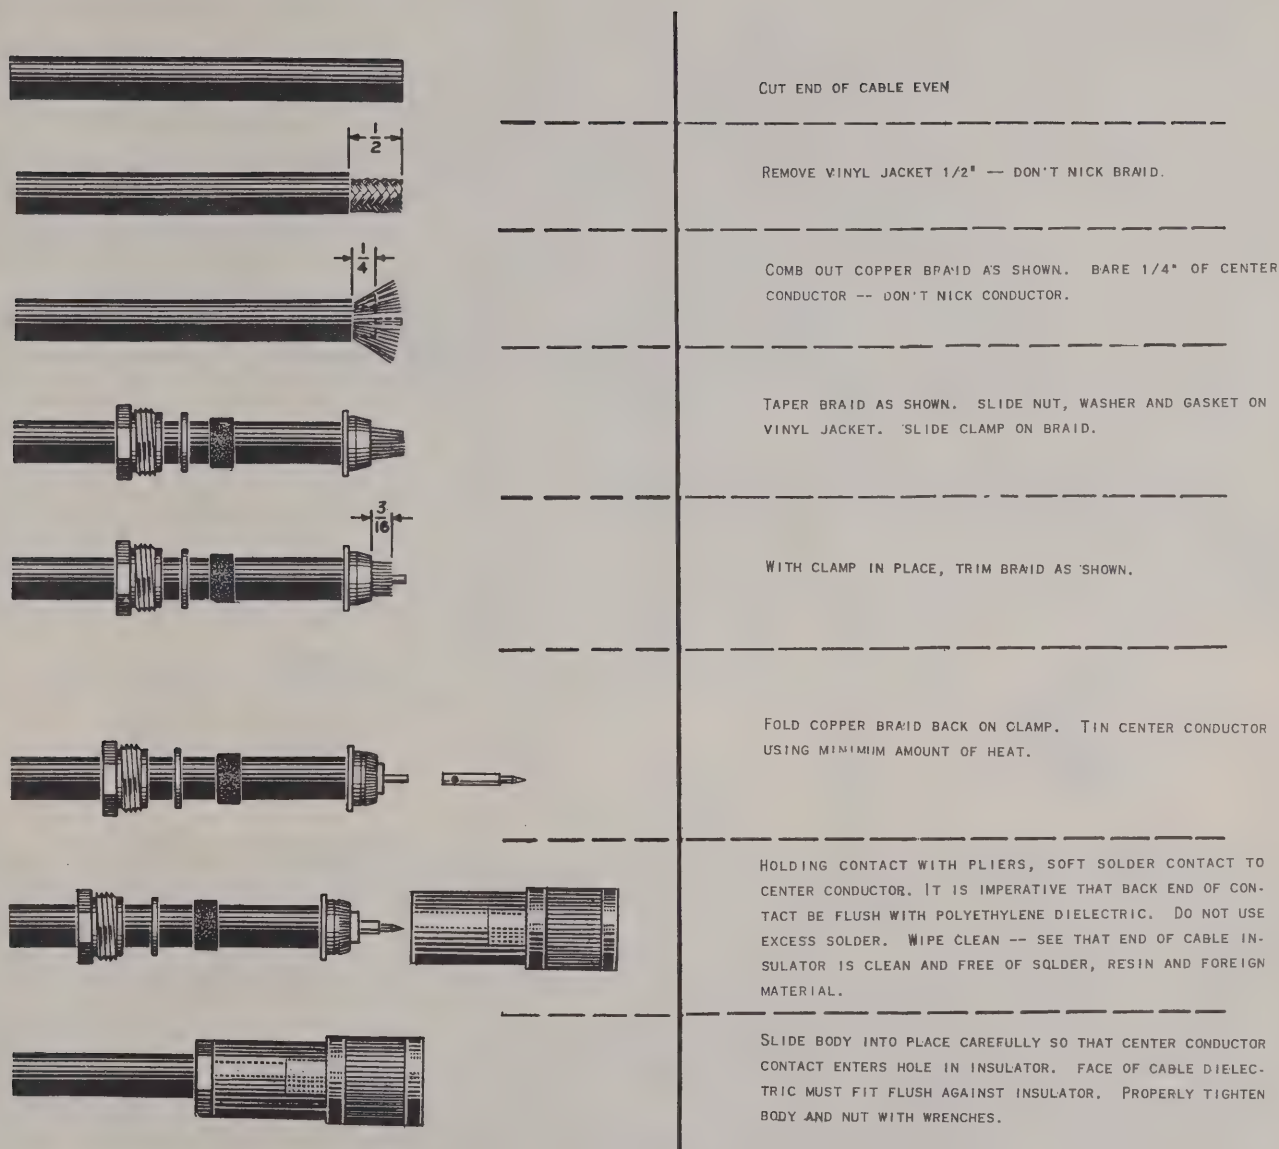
Cable Fabrication, UG-21B/U Plug
